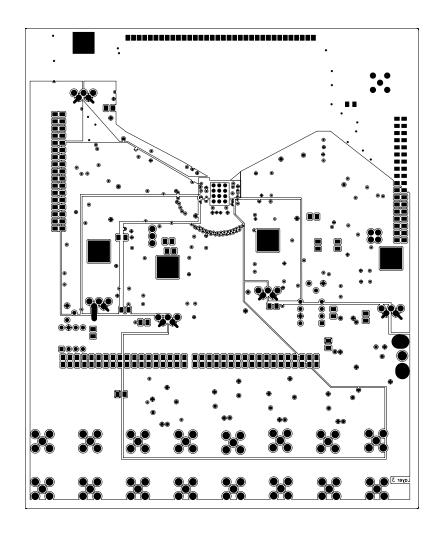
PCB of the test board (layer 2 of 4)  $\,$
